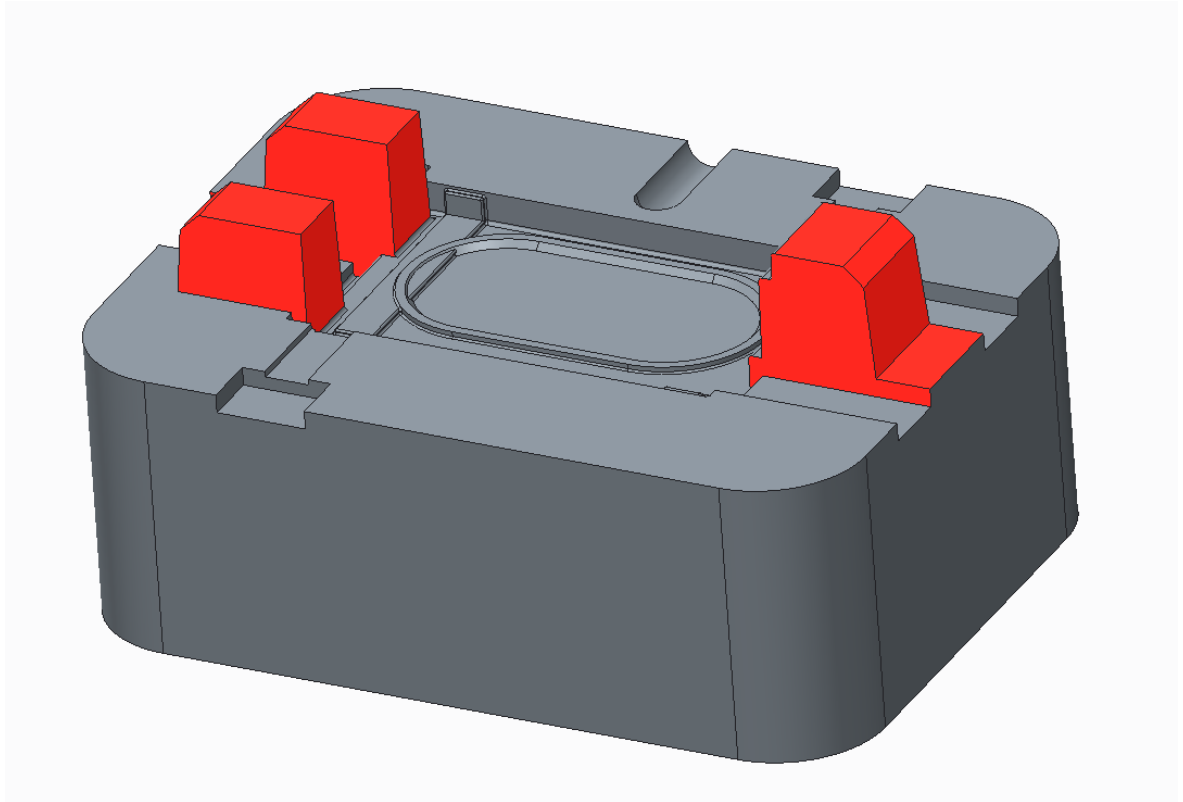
Cavity insert for detail design part prototypes, with problematic structures marked in red.
